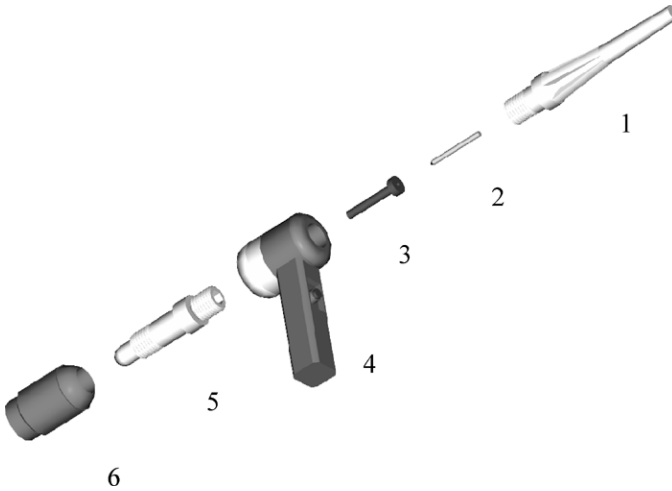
Exploded view of a torch: back cap – 1; electrode – 2; collet – 3; handle – 4; collet body – 5; nozzle – 6
